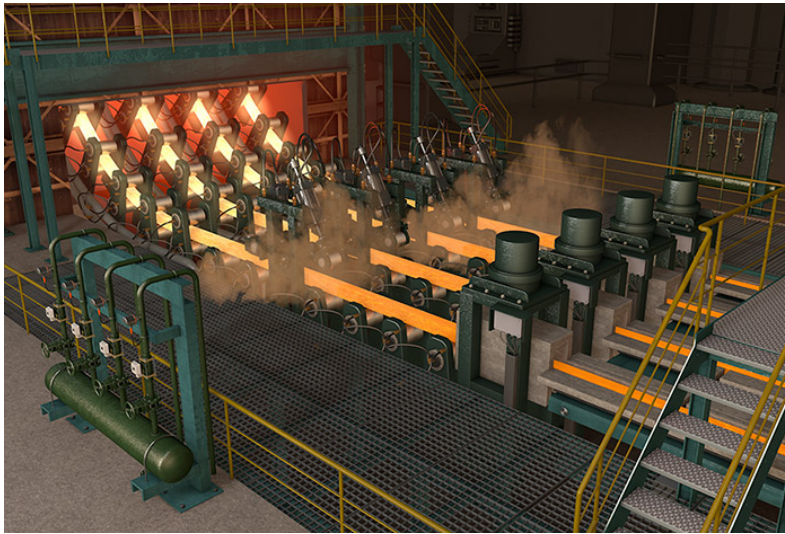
Final section of *curved apron* casting process. Water is sprayed on hot metal during secondary cooling, forming steam.
